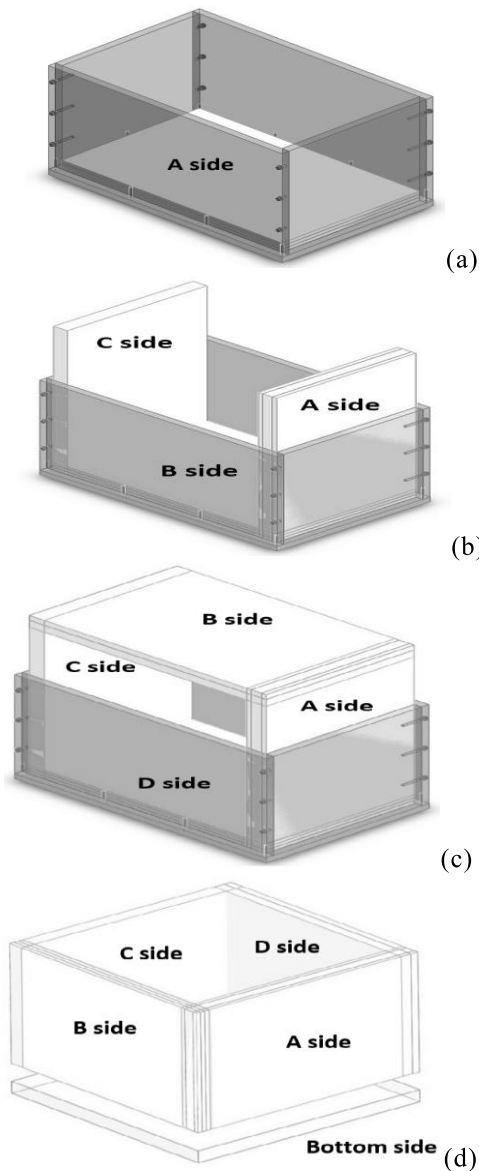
Sequential molding casting process. (a) Three layers of skin, skull, and CSF were casted by pouring silicone mixture into the mold layer by layer for the A and C sides of the phantom, separately. (b) A and C sides linked together during the forming of B side. (c) A, B, C, and D sides linked together during the forming of D side. (d) All four sides are linked together by the bottom side forming the cubic container.
